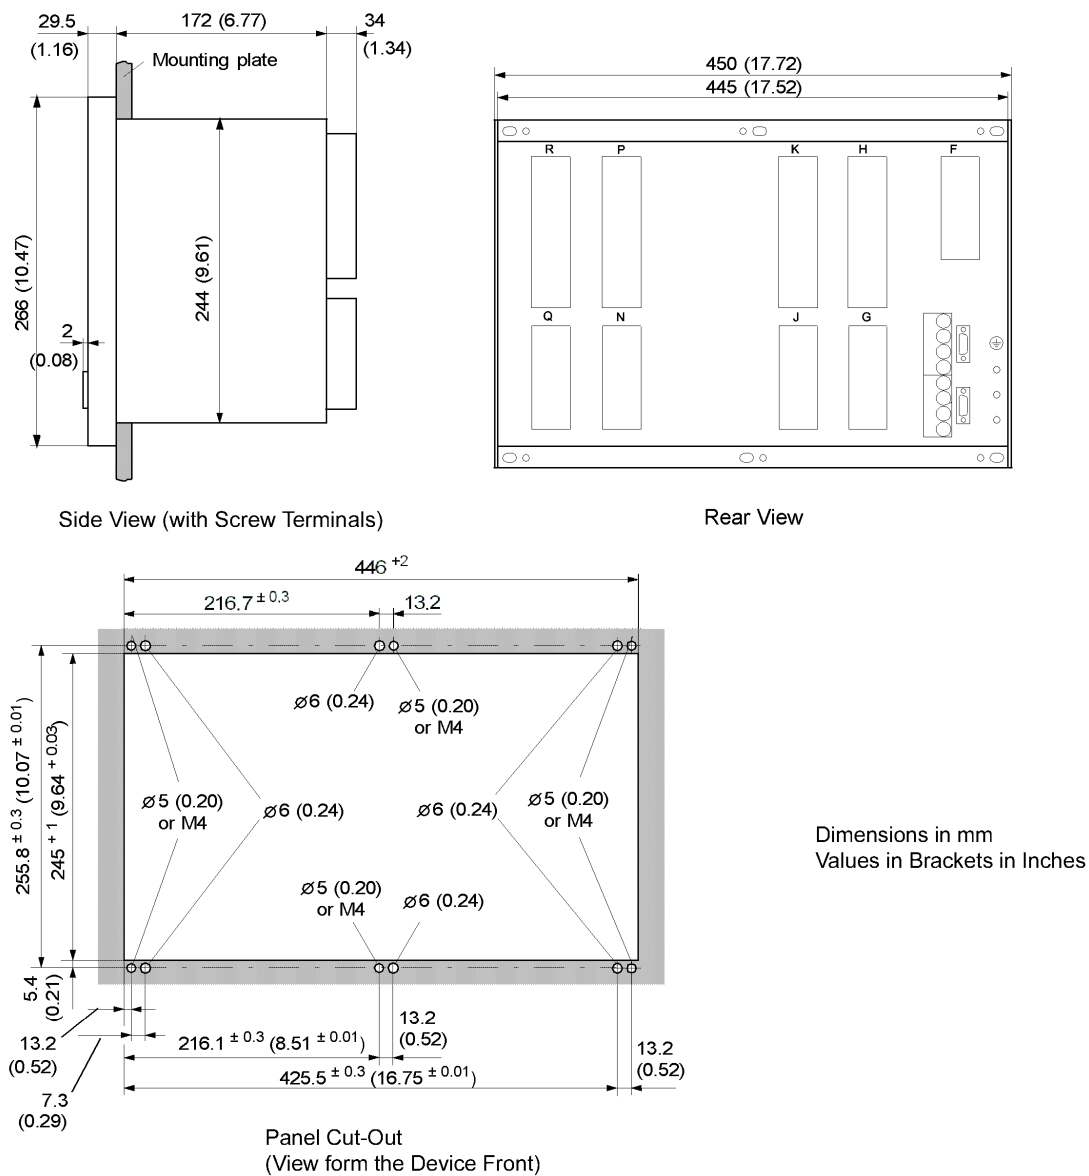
Dimensional drawing of a 7ST6 for panel flush or cubicle mounting (housing size $1\frac{1}{4}$)
